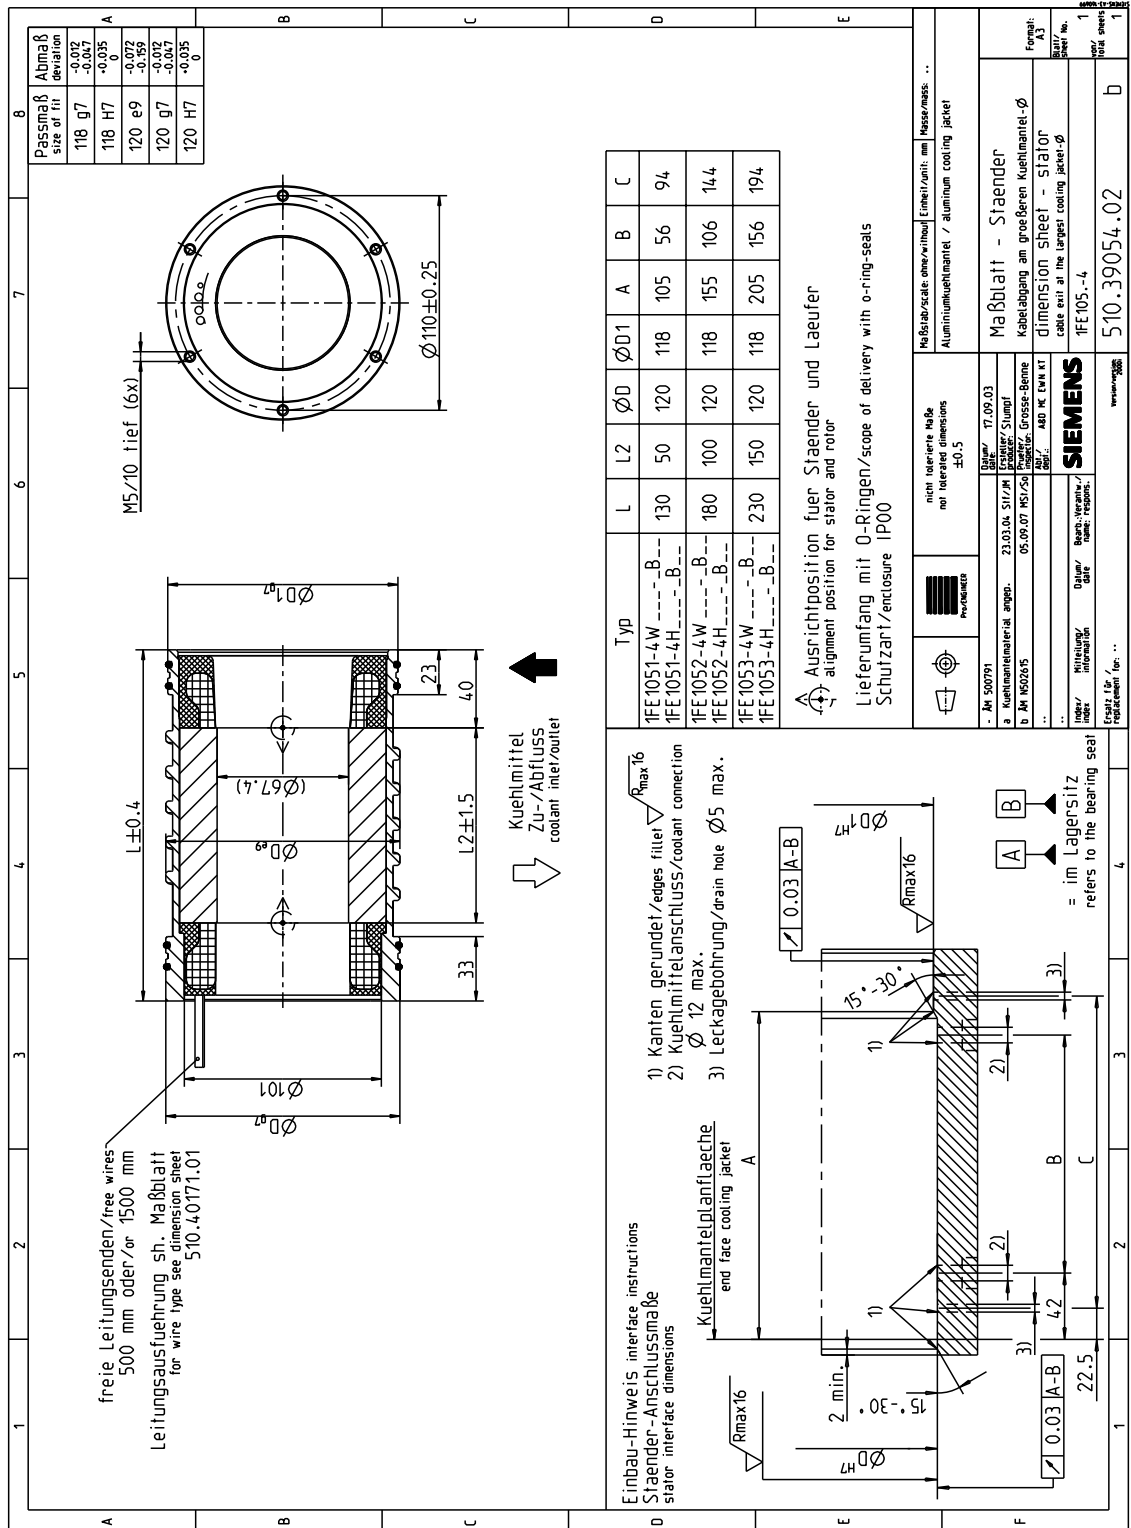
1FE105□-4, stator with cooling jacket, cable outlet at the larger cooling jacket diameter
